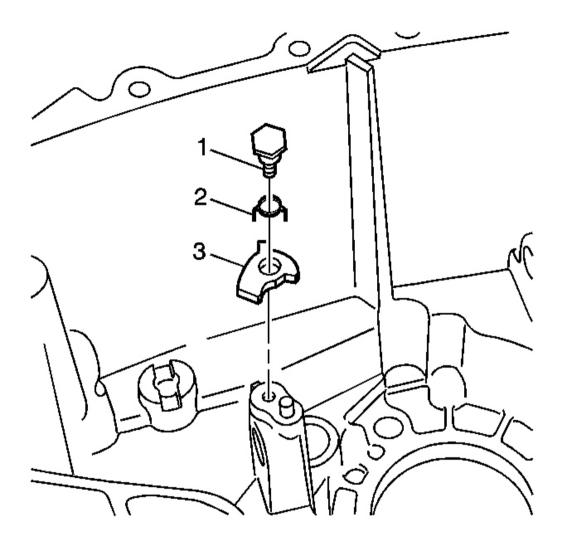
View Of Transmission Housing Bolt, Spring & Reverse Lockout Lever Courtesy of GENERAL MOTORS CORP.
